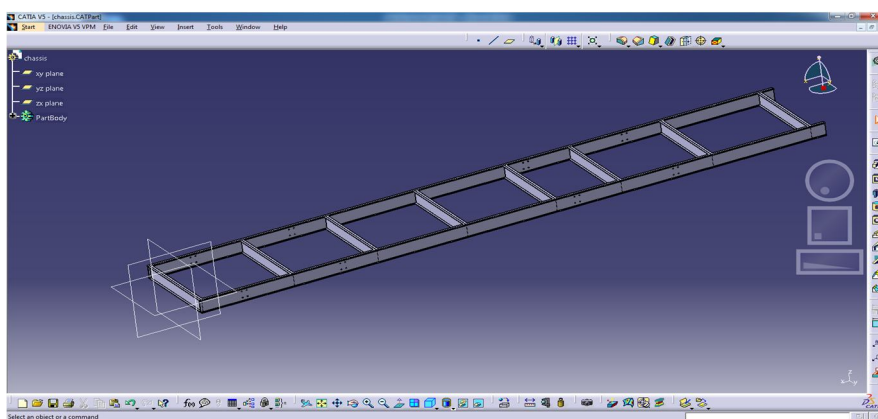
Heavy Duty Chassis with I Type cross Section.
